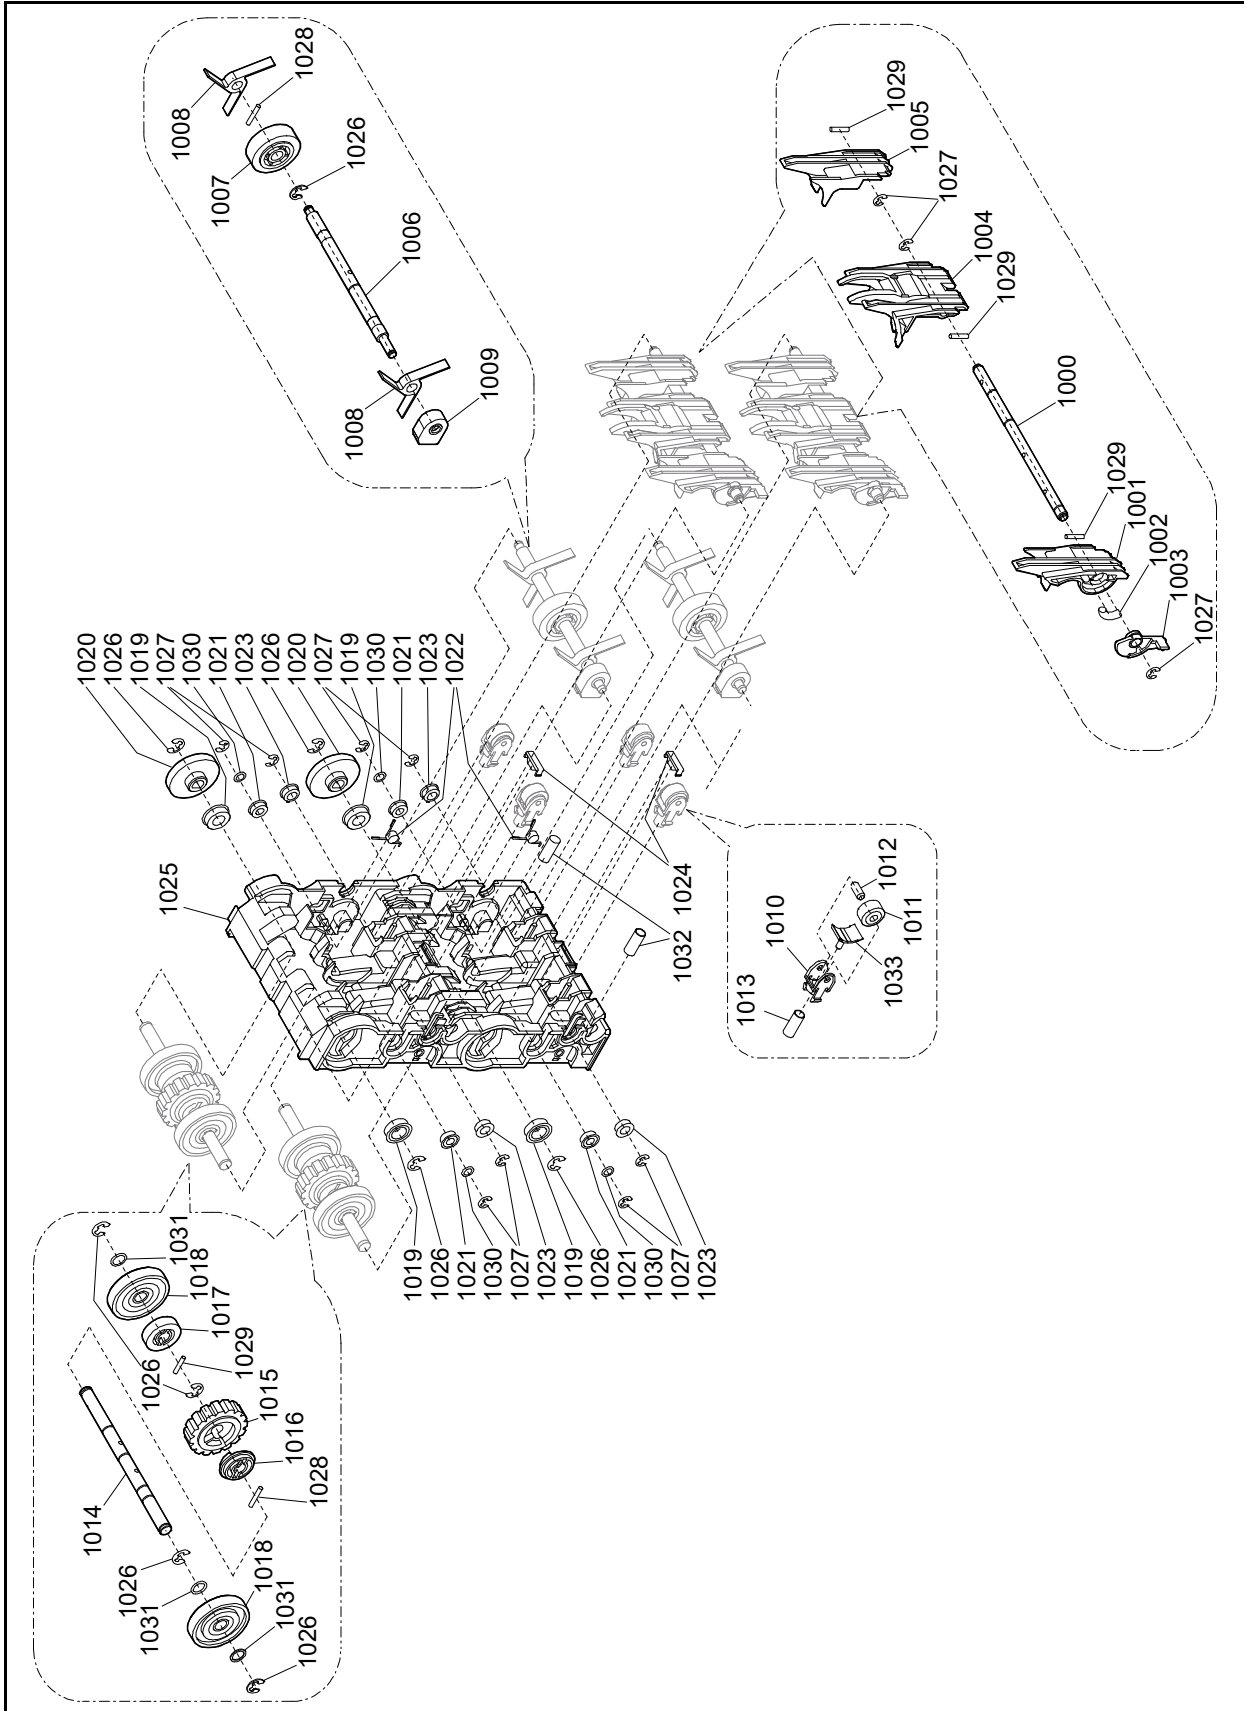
iPRO-RC Recycler Unit 5 Exploded View
